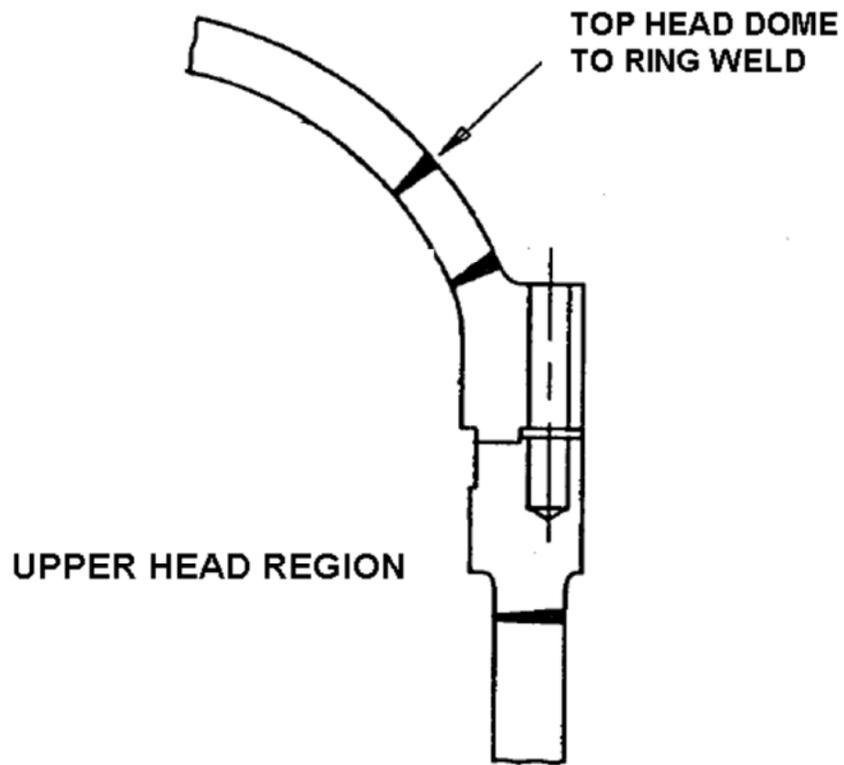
Reactor Vessel Head Dome-to-Ring Weld Location
